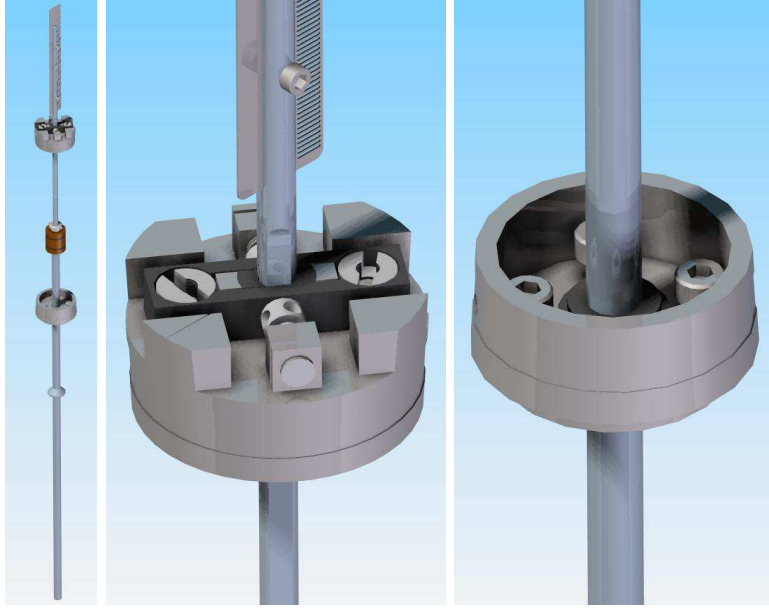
(left) Shaft and bearings, (middle) Upper bearing with anti-rotation, (right) Lower bearing
